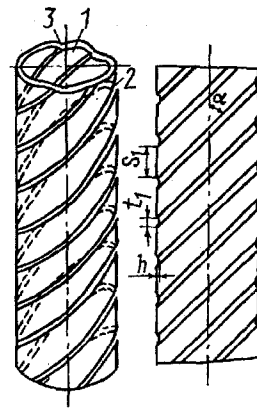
Tube having inclined grooves and diaphragms: 1) tube; 2) grooves; 3) protrusions.
